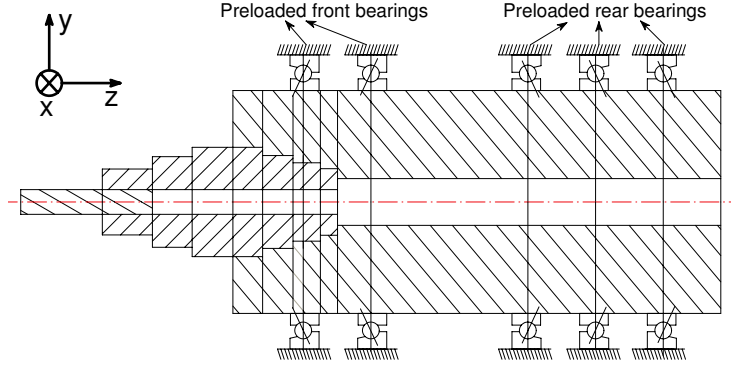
A motorized spindle having bearings in O-arrangement with fixed outer rings
